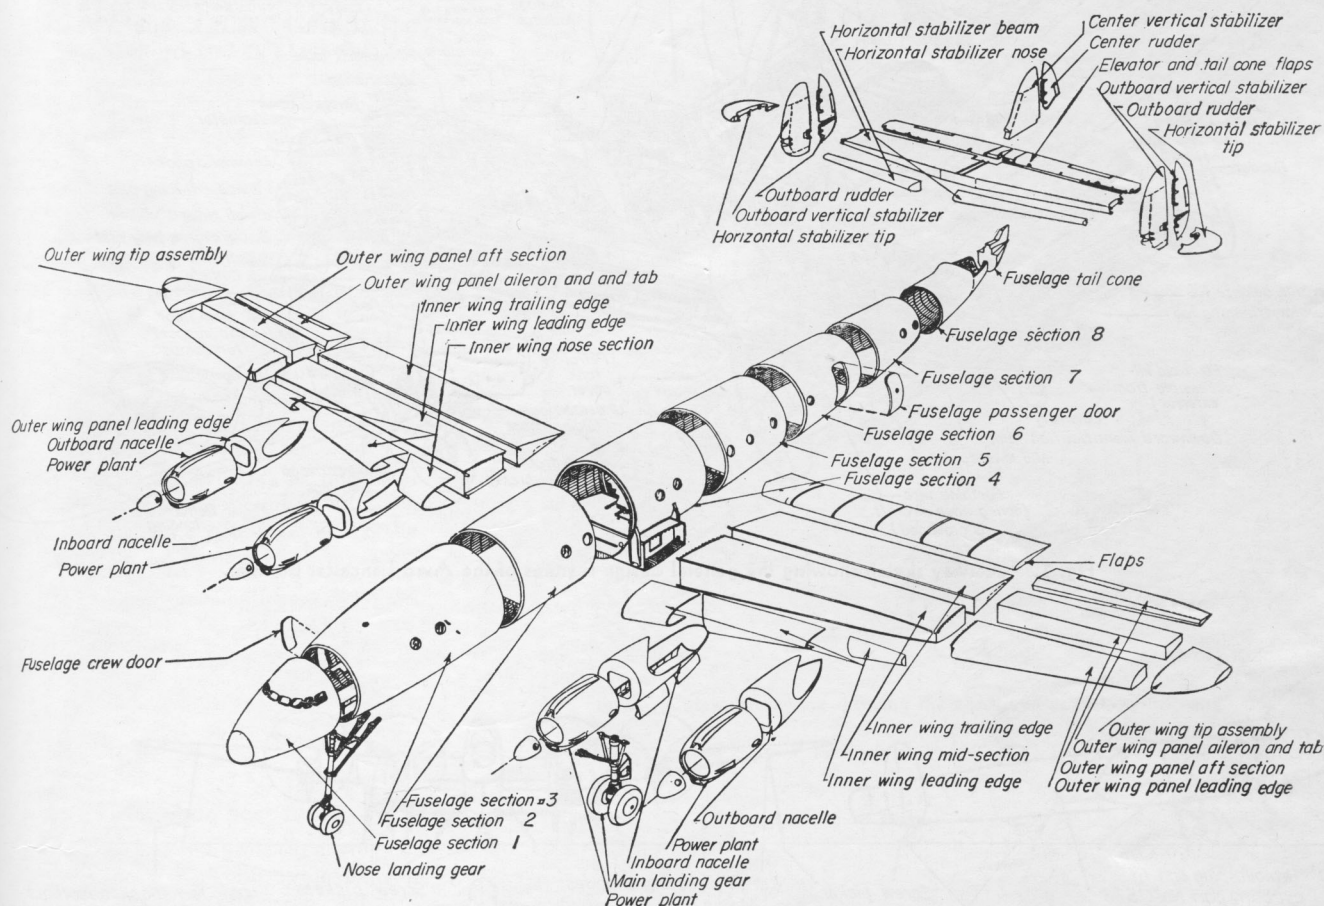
Exploded view showing the major structural components of Lockheed Constellation C-69 transport.
